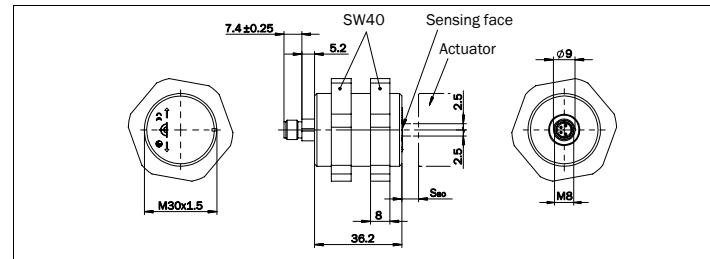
Dimensional drawing RE31-DAC magnetic safety switch
